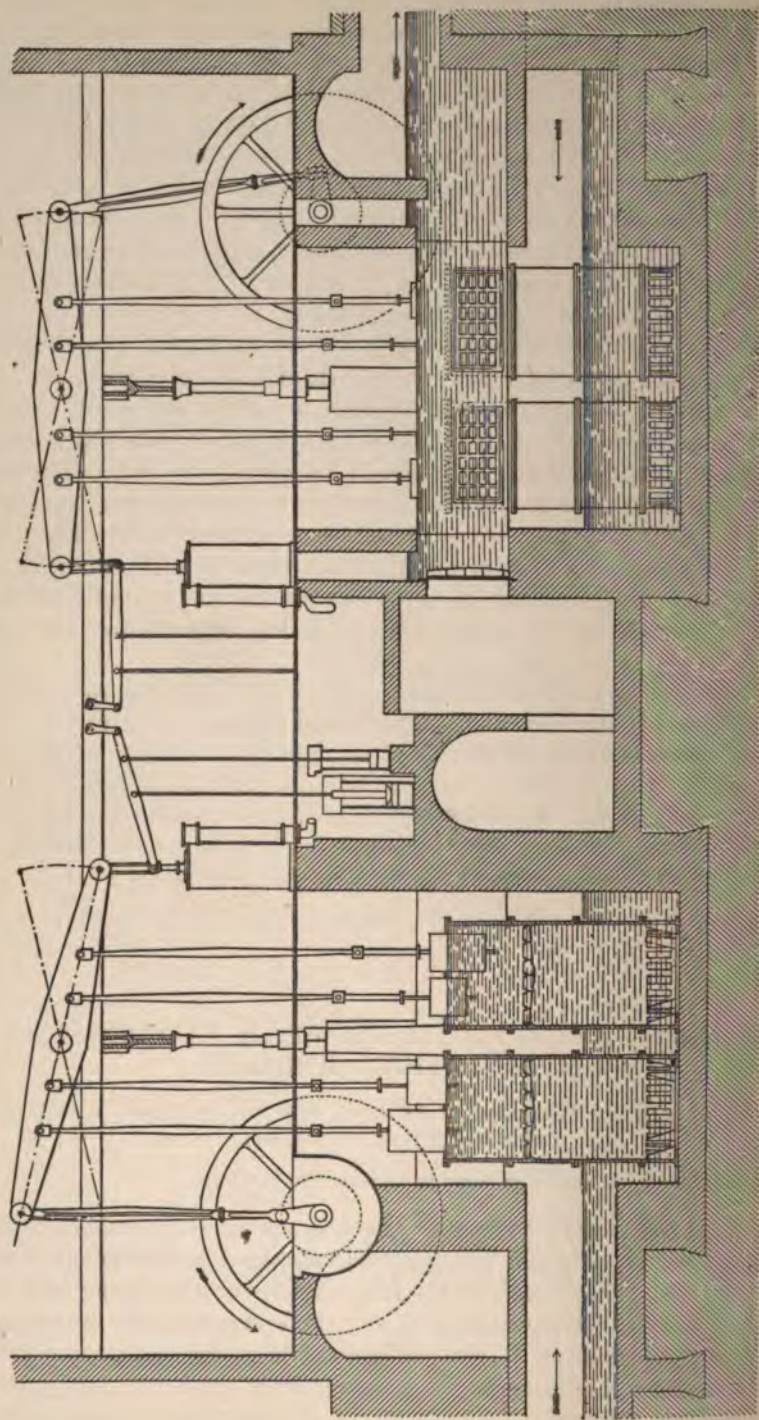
James Watt & Co.: Rotative Beam Condensing Pumping Steam Engines, Metropolitan Board of Works, Crossness Station. Scale 1/4 inch to the foot.
